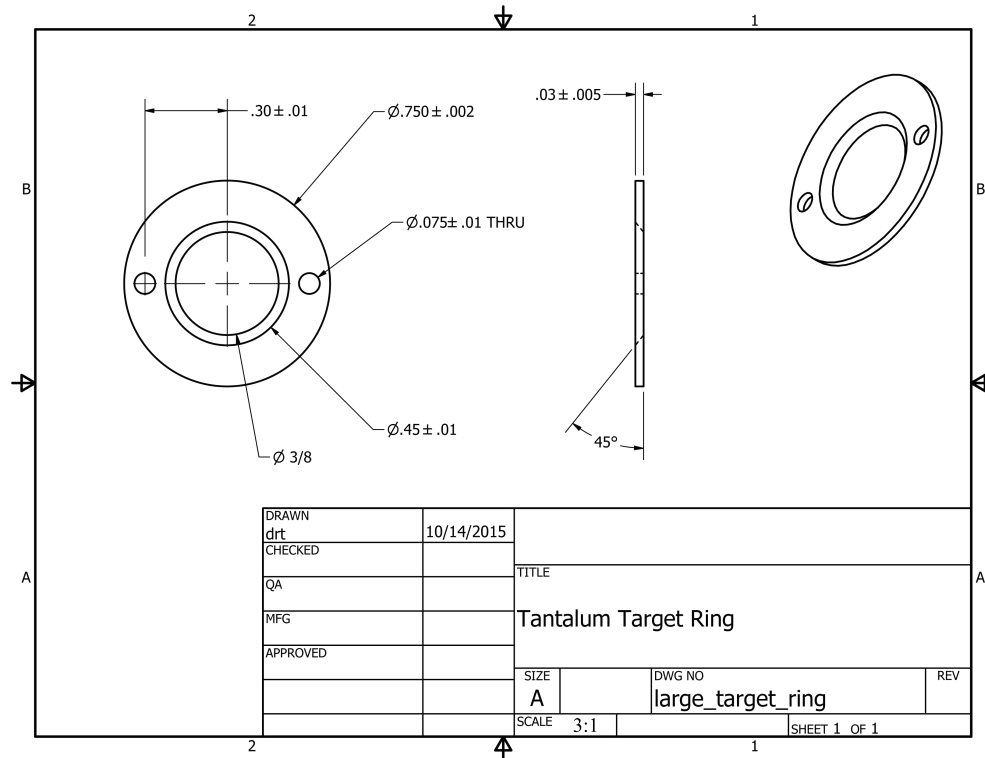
A technical schematic of a target ring, dimensions are in inches. See online version for CAD file.
